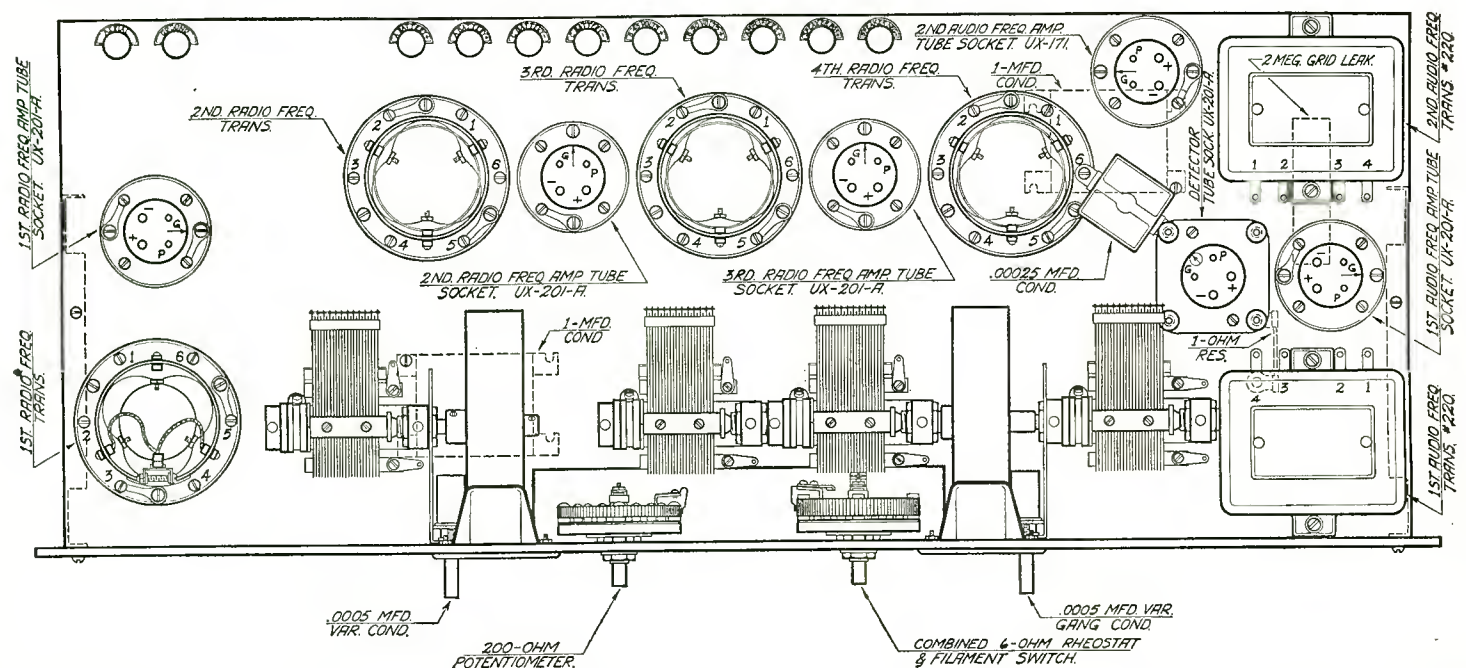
Parts for this receiver should be placed in accordance with this layout, and then wired either by the schematic or graphic illustrations
